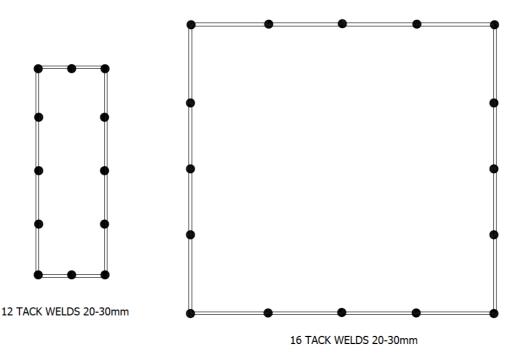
Tack welds. Sequence and dimensions.
